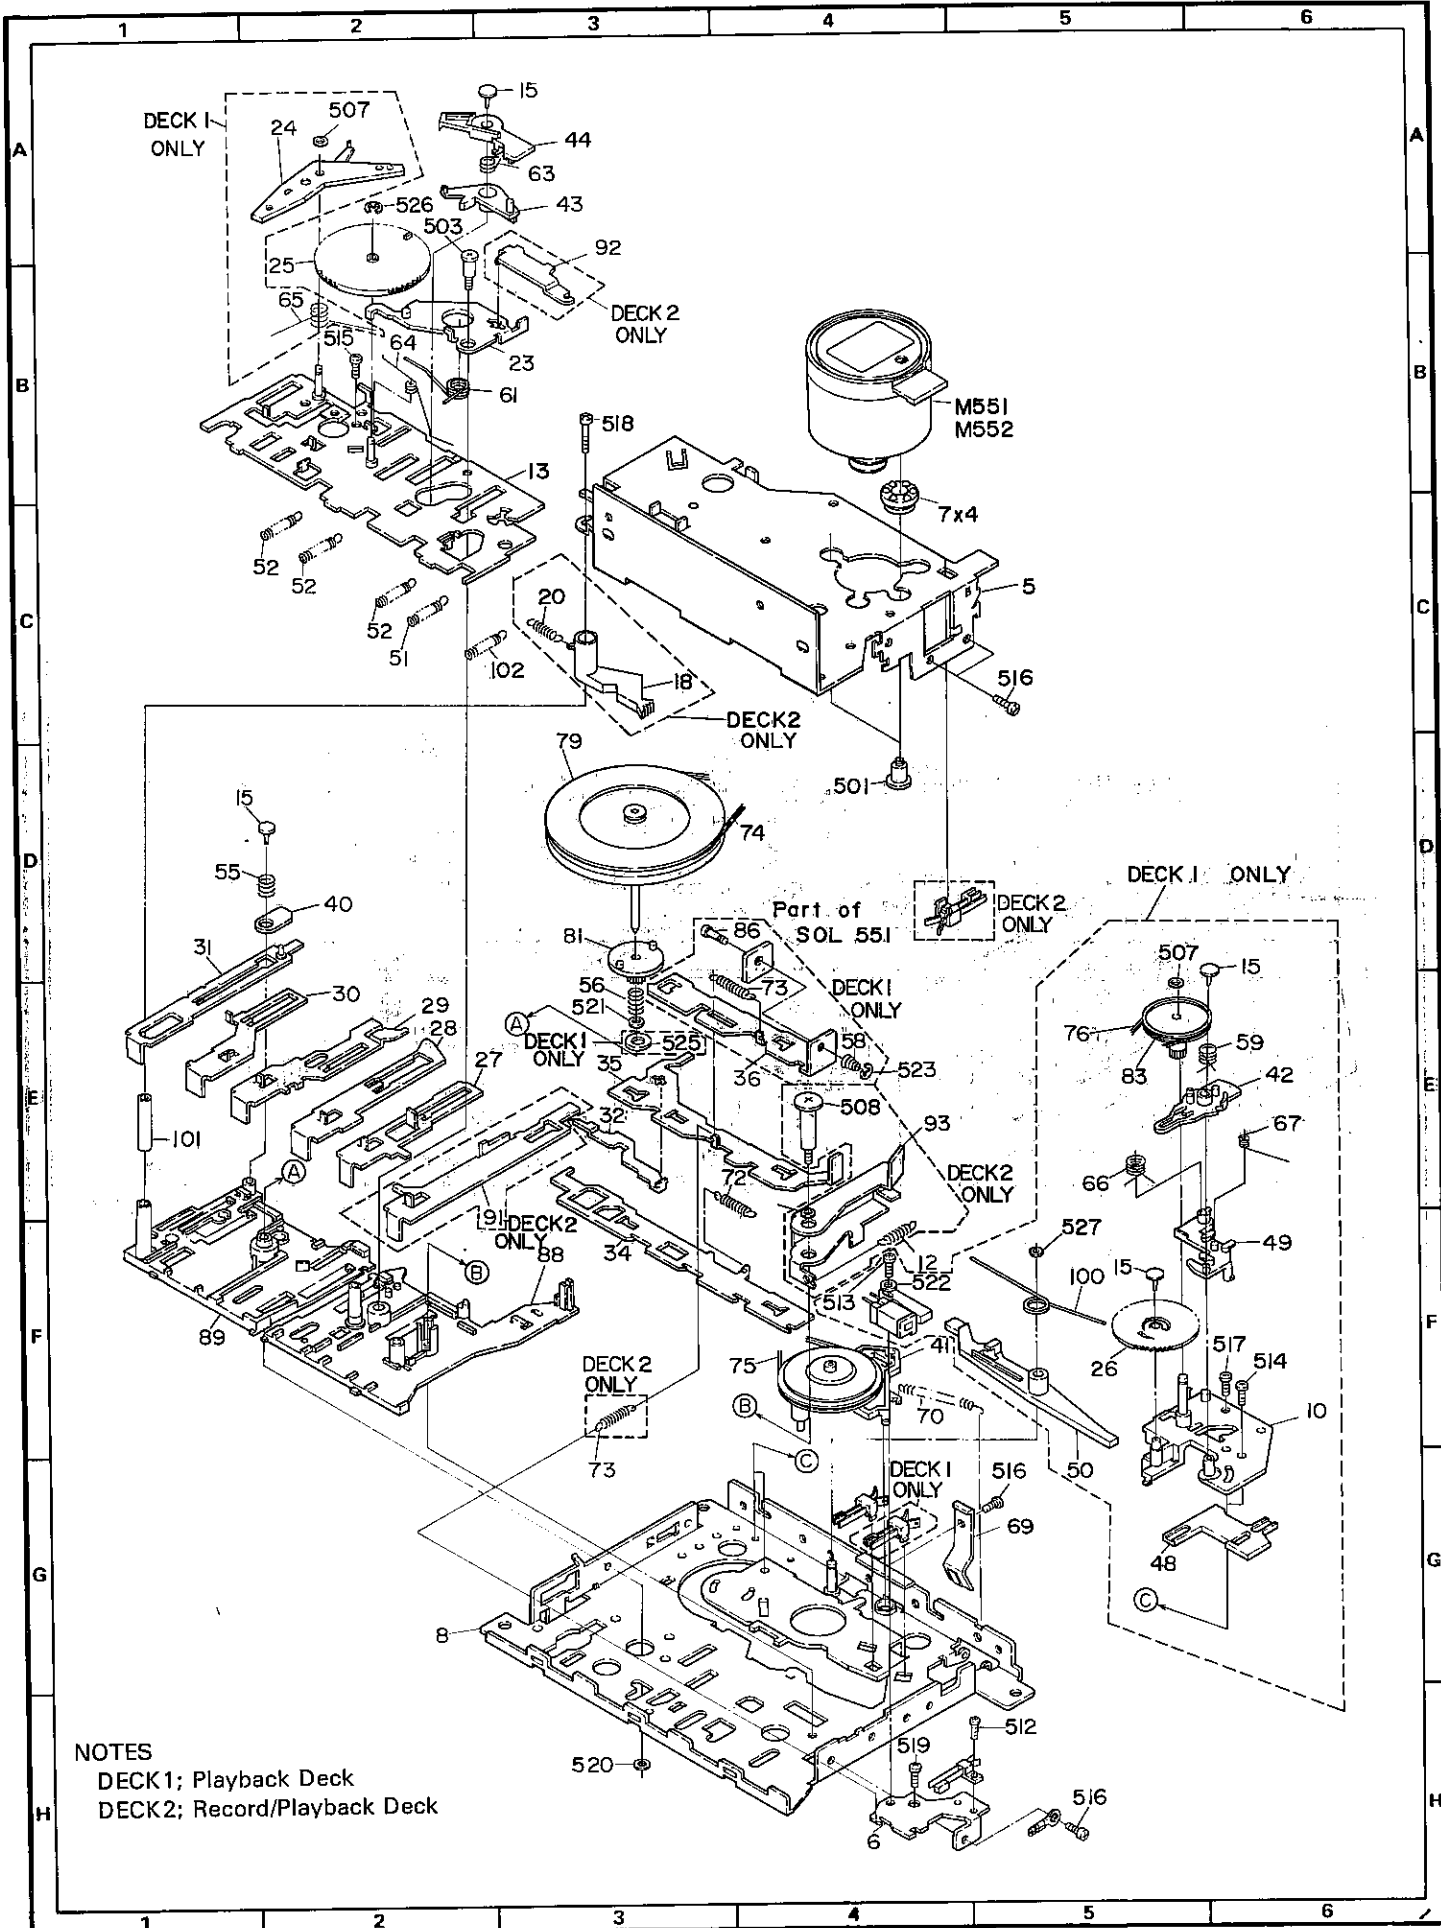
MECHANISM EXPLODED VIEW (1/2)
